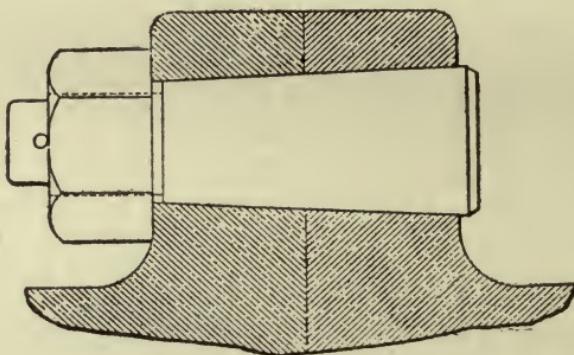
DETAIL OF FLANGE COUPLING AND BOLT
